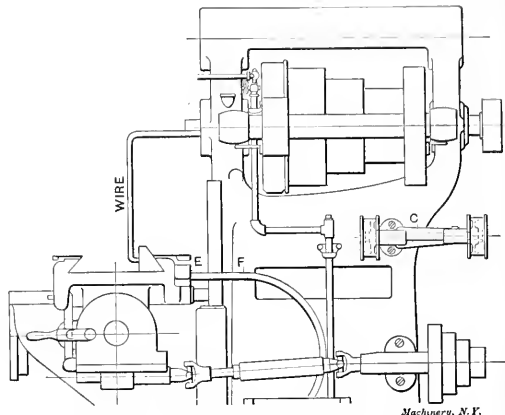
Testing the Alignment of the Milling Machine Saddle.
